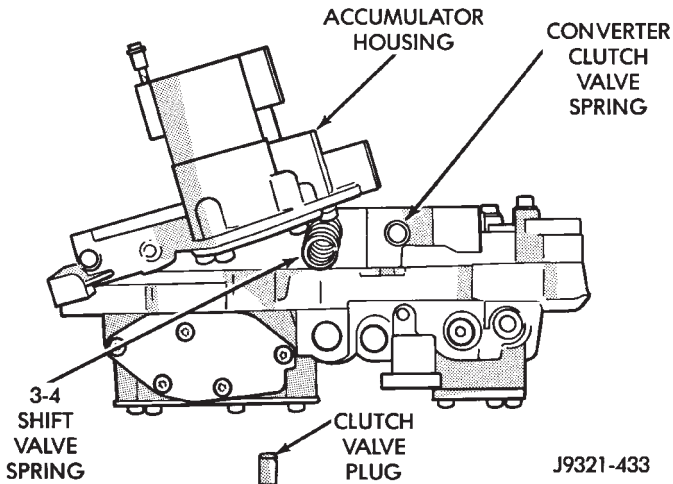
3-4 Shift And Converter Clutch Valve Springs And Plug
